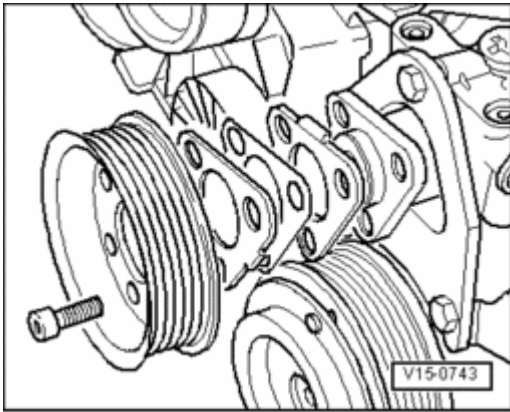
Adjusting Distance Between Ribbed Belt Pulley Of Vane Pump To Ribbed Belt Pulley Of A/C Compressor Using Spacer Discs
